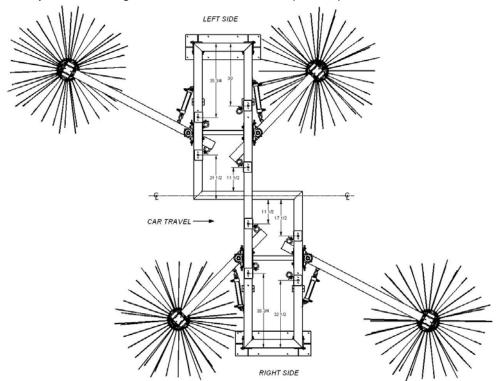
Dual Pack Flex Wrap in Retracted Position
